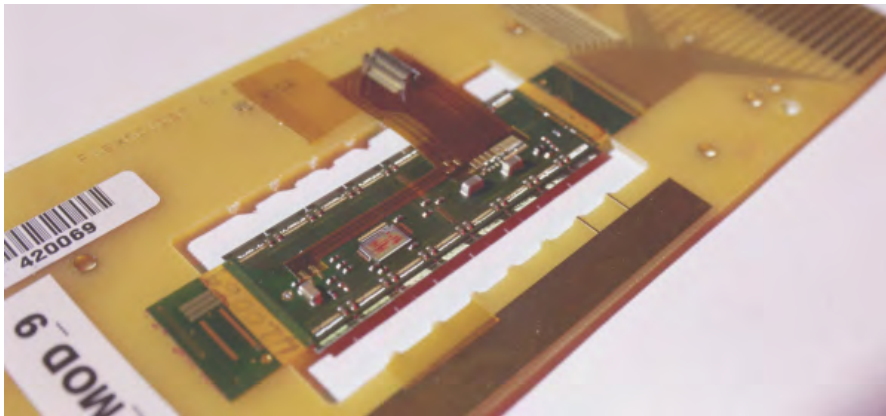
Image of a full dressed ATLAS module. The module is glued with the flex-hybrid on a support frame to ease handling during production and testing.
